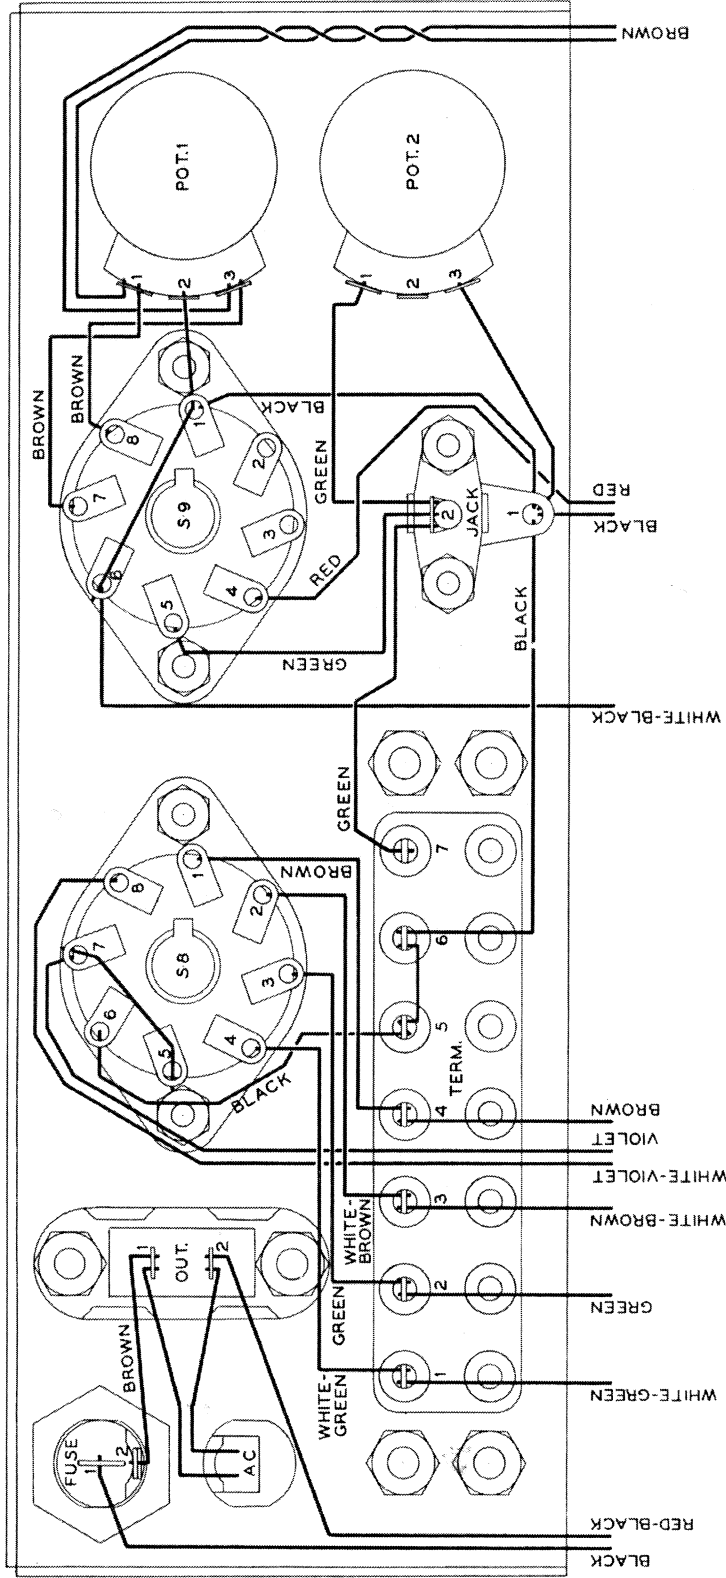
FULL-SIZE DIAGRAM OF THE PARTS AND WIRING INSIDE THE RIGHT-HAND END OF THE CHASSIS
